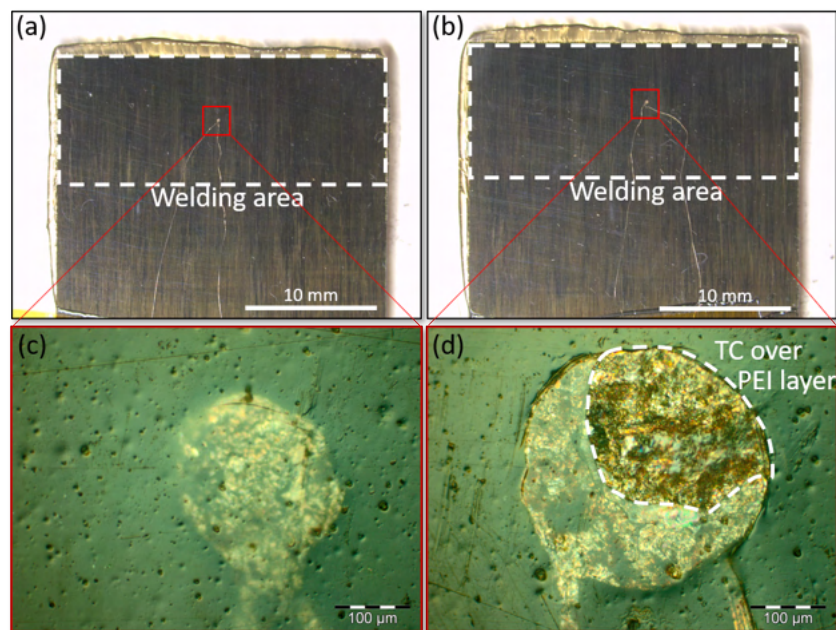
Micrographs of welding specimens after integration of thermocouples in the welding area with a magnification of x0.75 (a,b) and x20 (c,d)
